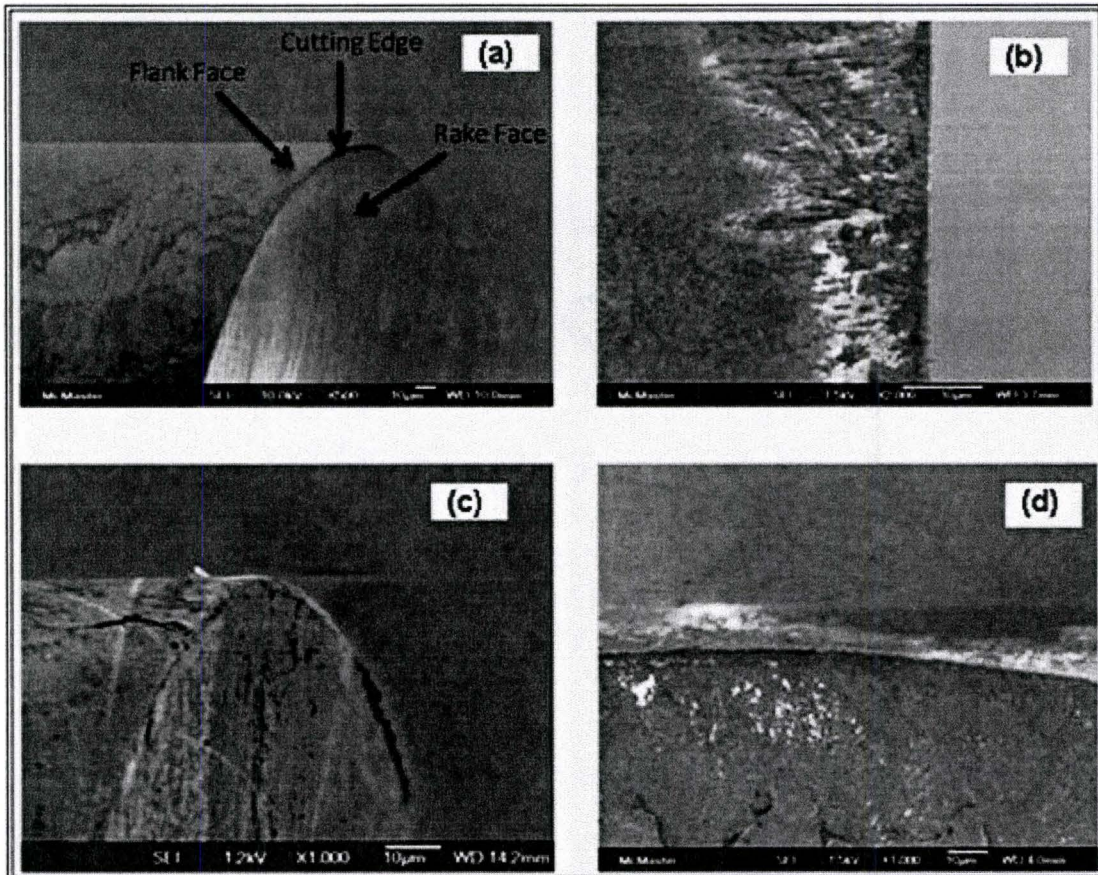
SEM images of the diamond tool (a) new tool, (b, c) adhesion of material on flank face (c, d) rake face after machining (CP-Ti)
